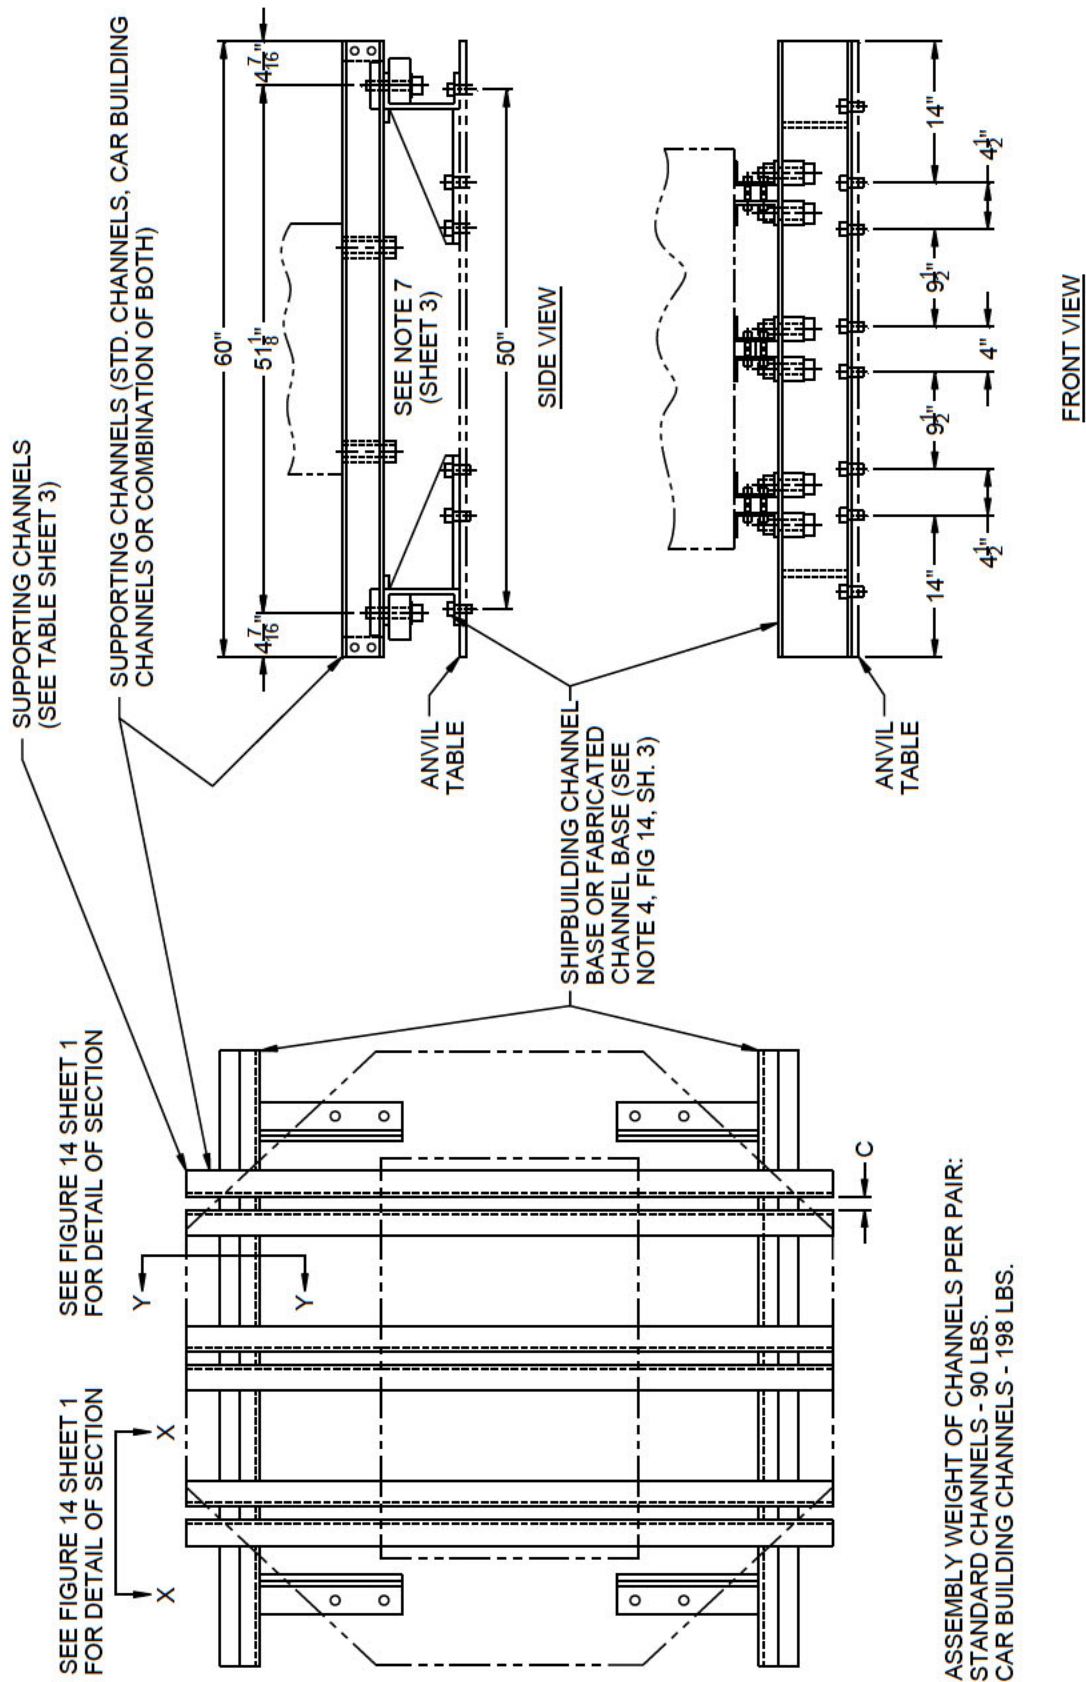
Standard mounting platform for testing equipment on the MWSM. (Sheet 1 of 3)
